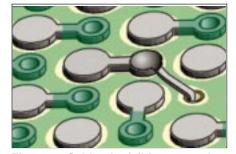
Solder the foil jumper to the plated hole connected to the BGA pad.
